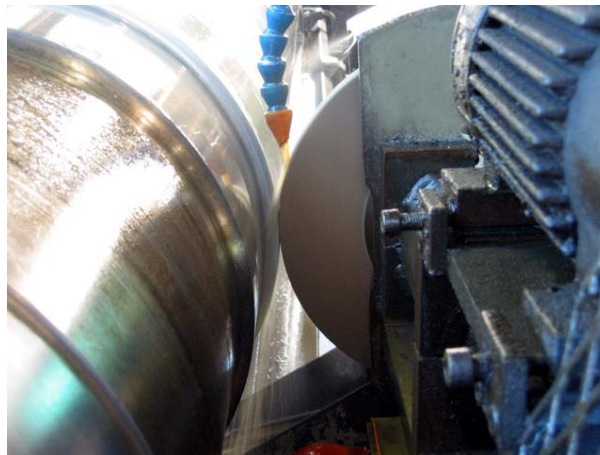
Grinding of shaft. Picture from Bowe Machine Company.
